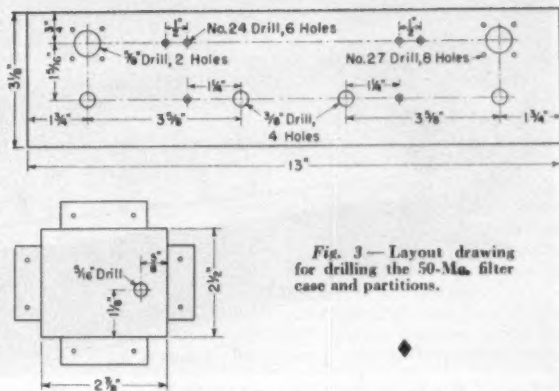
Layout drawing for drilling the 50-Mc. filter case and partitions.
